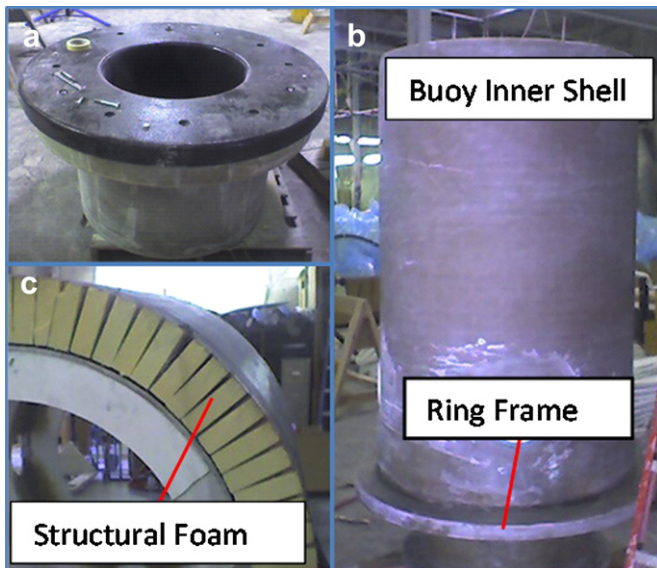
a) Buoy lid b) Buoy inner shell and ring frame c) Buoy outer shell with added foam.
